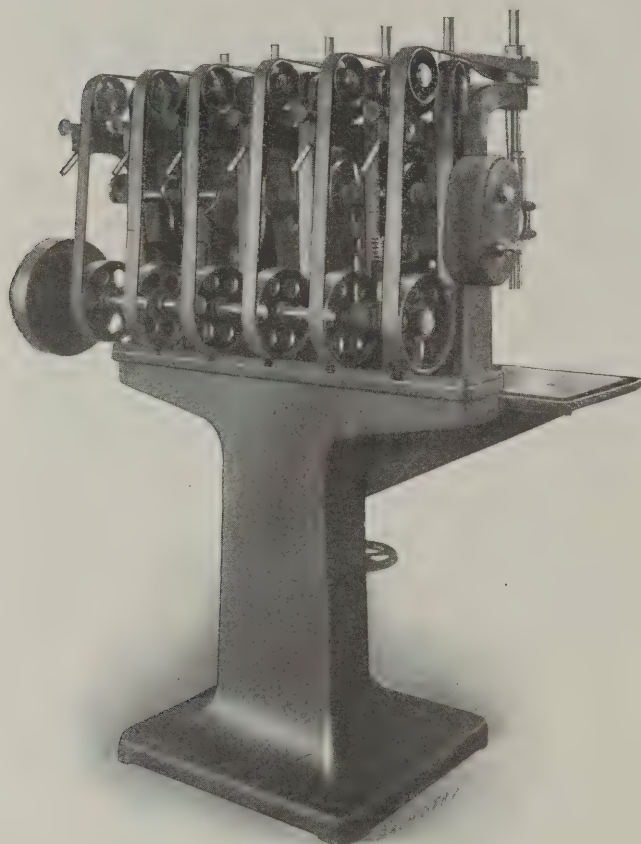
Rear View of Six-spindle Cam-feed Drilling Machine
